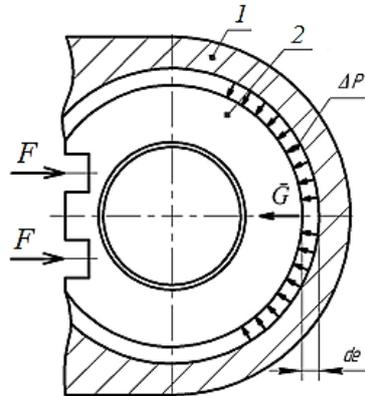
Fluid leakage design scheme: 1 – pump housing; 2 – sleeve;
